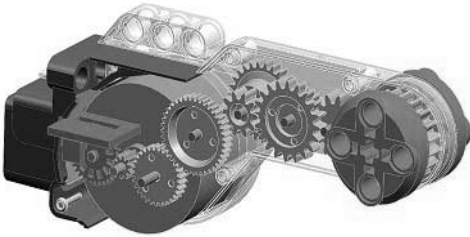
Inner gearing of the NXT motor (Image courtesy of LEGO Education)
